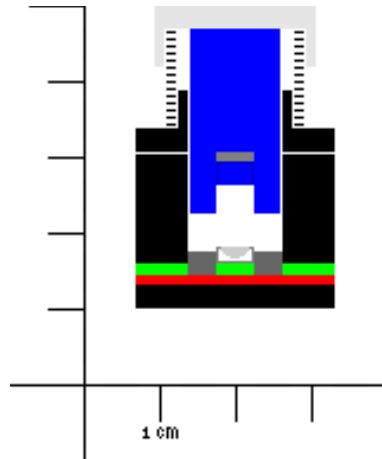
A schematic of a fully machined key. The key stem is cylindrical and has protruding blocks in the middle. The spring is at the top. The black support structure guides the key stem and is shaped so that the components and moving parts fit.
